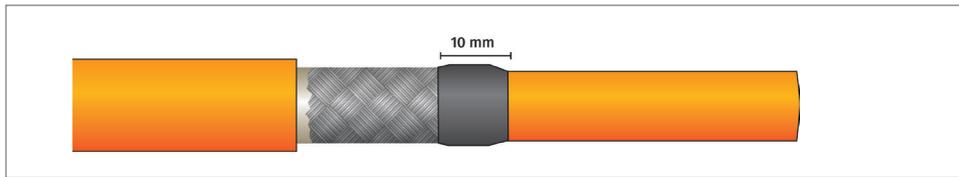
Step 5: Attaching and fixing the shrink sleeve
